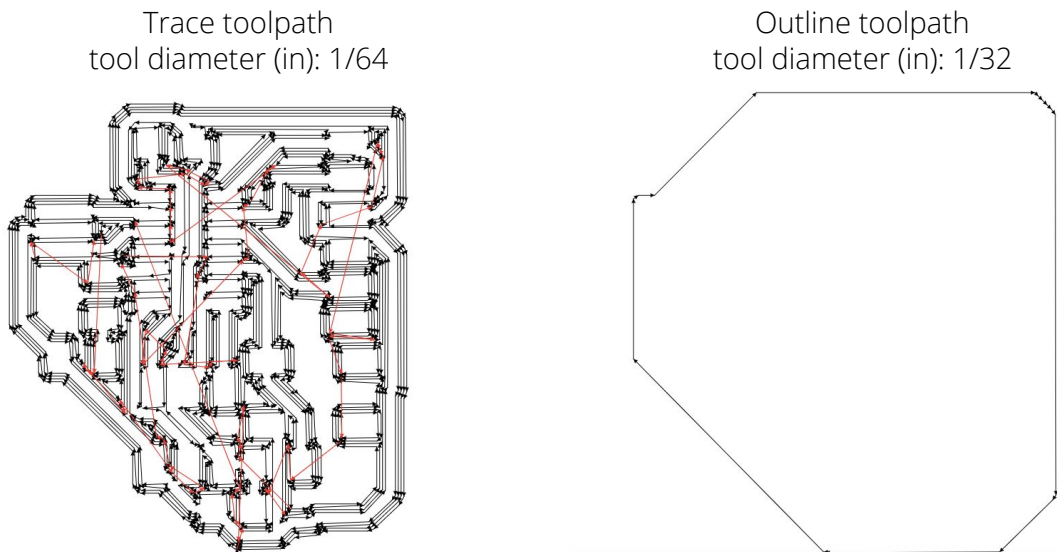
PCB design diagram for ESP32 controller (MODS, 2019)
